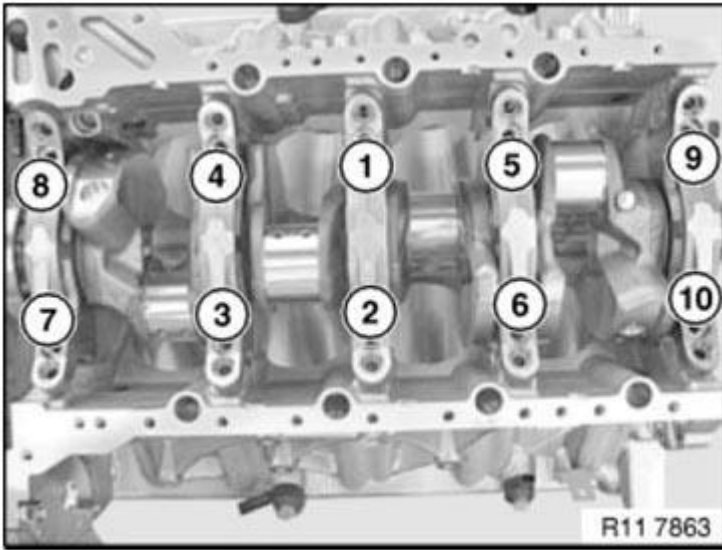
Identifying Collar Bolts (M11) Tightening Sequence
